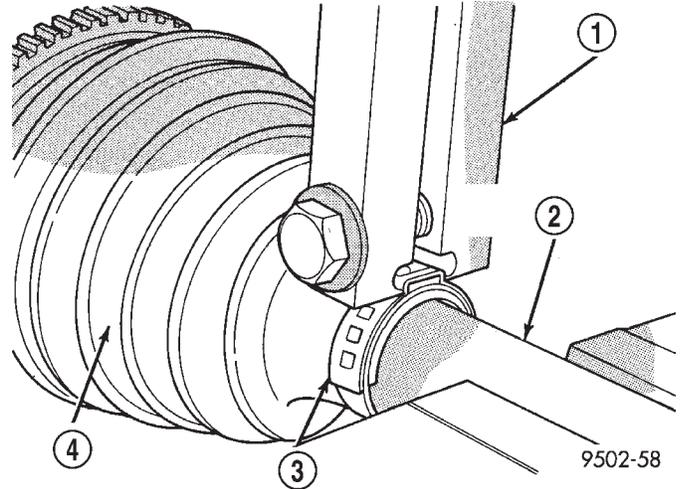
Crimping Tool Installed on Sealing Boot Clamp
